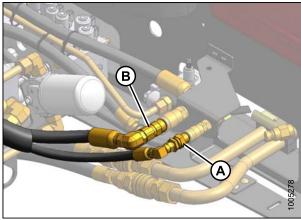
Auger/Reel Pressure and Auger/Reel Return Hose Couplers
